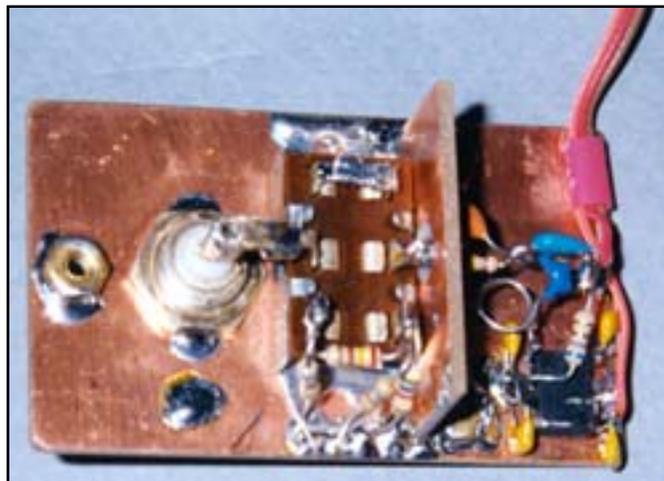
The signal-processing board is based on a RadioShack printed hole board. Notice the centrally located three-pin connector used to interface with the RF subassembly.
